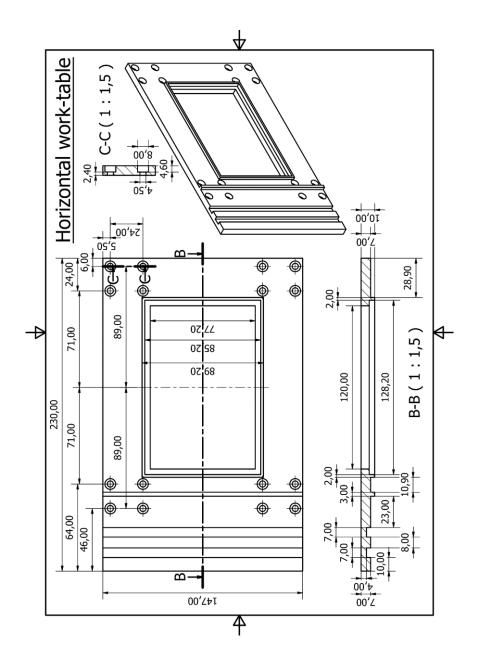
Fig C: Technical drawing of the moving platform. The moving platform was custom-made from 11 mm aluminum sheet material. All dimensions are provided in mm.
